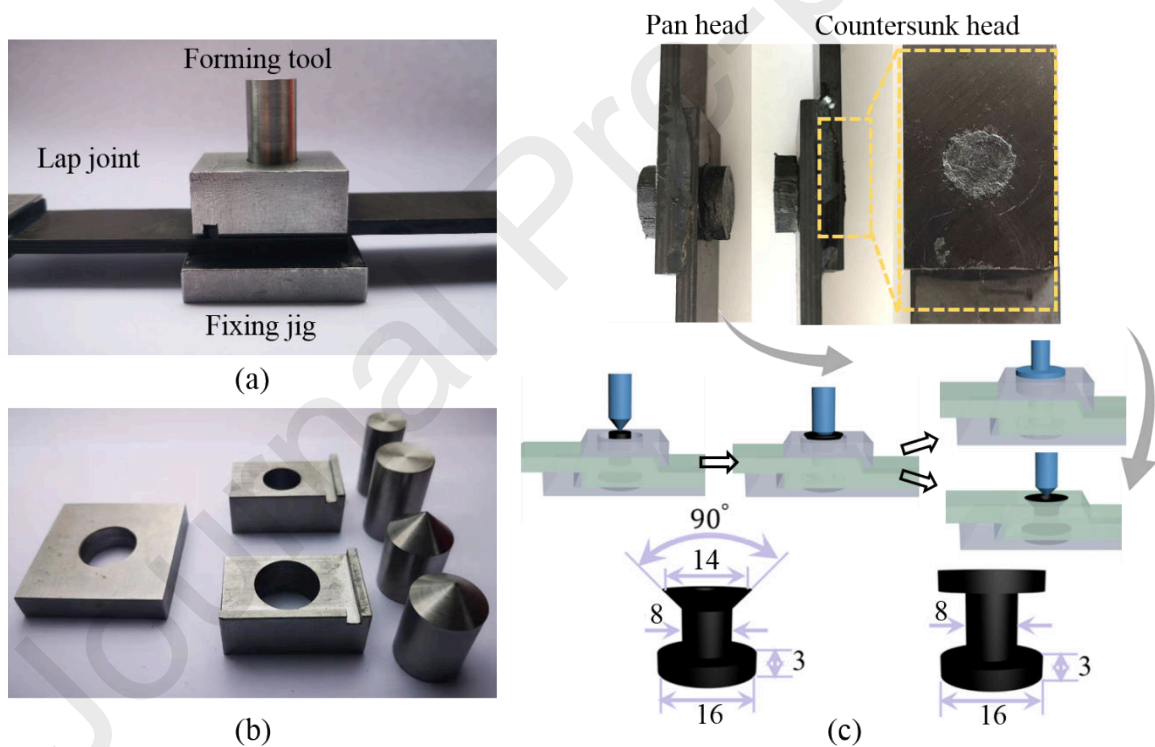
Fastening by thermal forming process including (a) forming tool set-up, (b) forming tools for different head type, (c) procedure and dimension of the formed TPCF.
